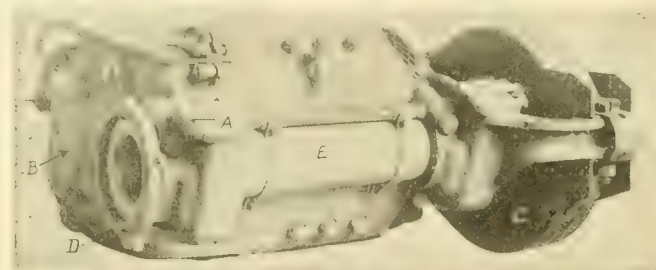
TYPICAL RAILWAY MOTOR EQUIPPED WITH PROTECTIVE IMPROVEMENTS
